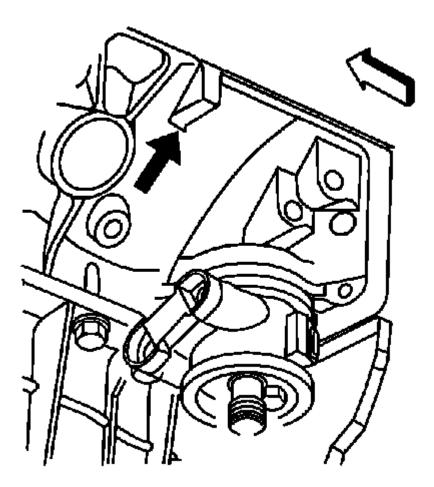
View Of Square Tab At Rear Of Engine Block Courtesy of GENERAL MOTORS CORP.
